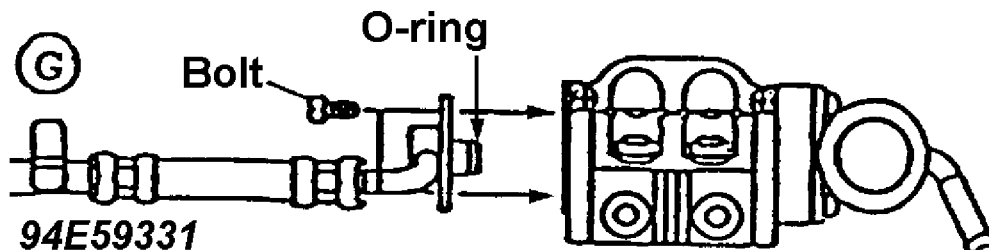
Installing Primary Fuel Distributor Outlet Modified Hose
